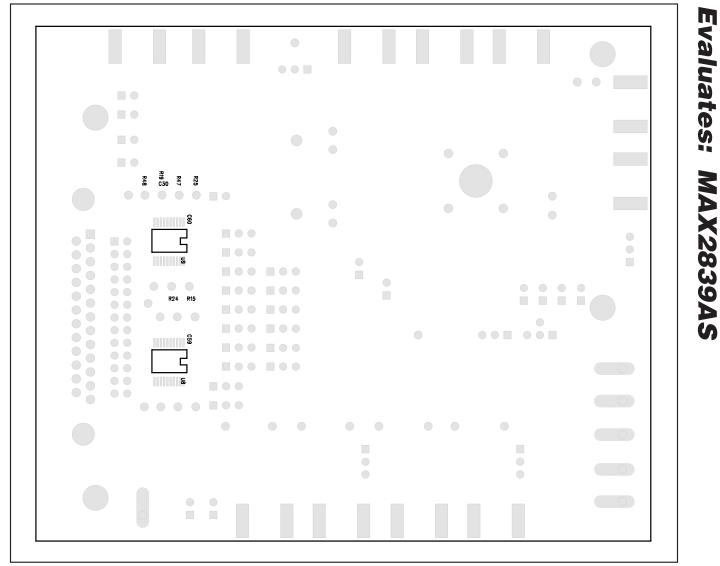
MAX2839AS EV Kit PCB Layout—Bottom Silkscreen
